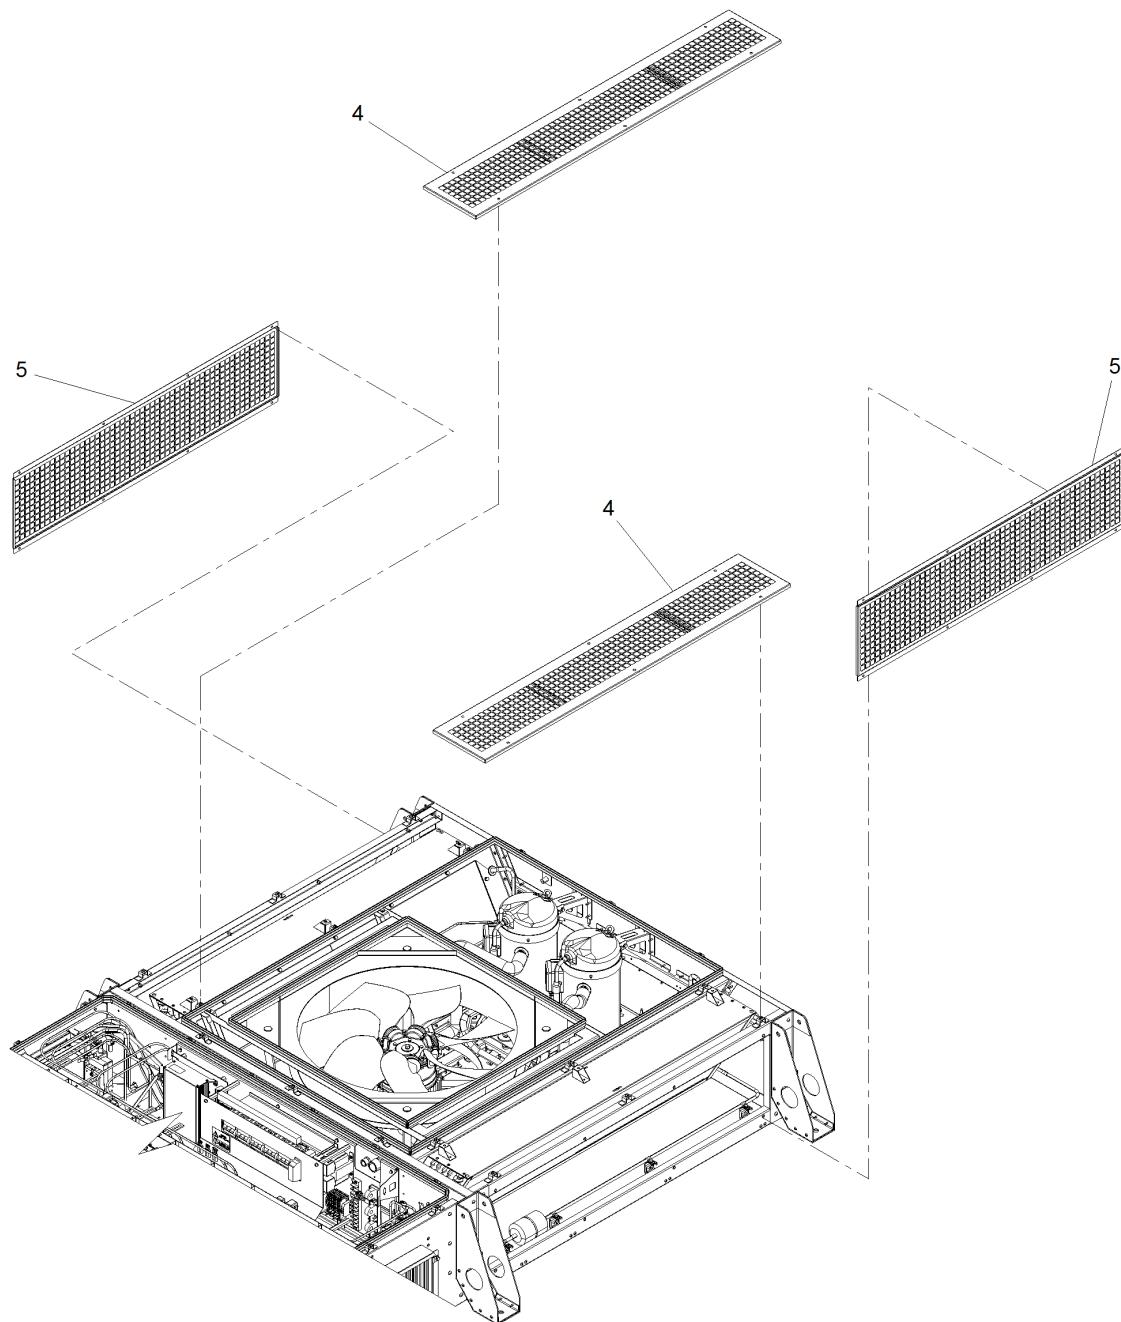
Clean and Inspect HVAC Equipment 30,000 Miles
